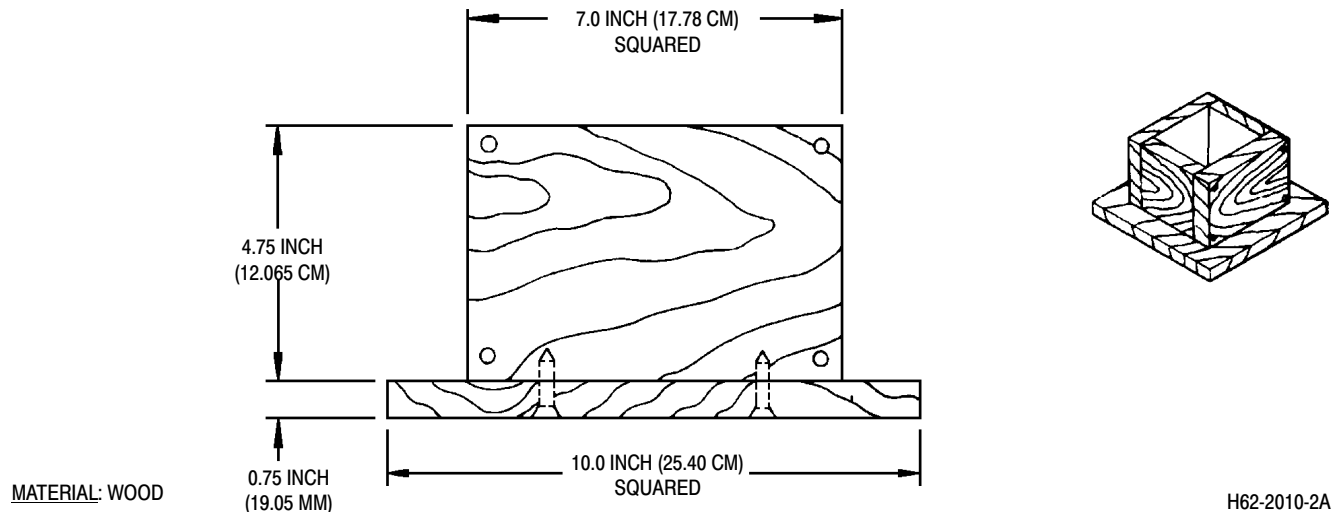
Tapered Bearing Tools - Main Rotor Hub (Sheet 2 of 2)
